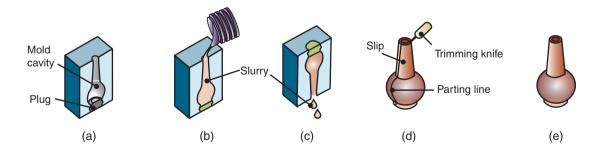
Sequence of operations in slip casting a ceramic part. (a) Mold is assembled and plug attached; some plugs incorporate draining features; (b) slurry, mixed from ceramic particles, binder and water, is poured into the mold; (c) the mold is inverted and the slurry is poured from the mold, leaving a thin coating over the mold cavity; (d) after an initial drying period, the slip is removed from the mold, and features such as parting lines and sprue lips are removed; (e) the slip is ready to be dried and fired in an oven, to develop strength and hardness.
